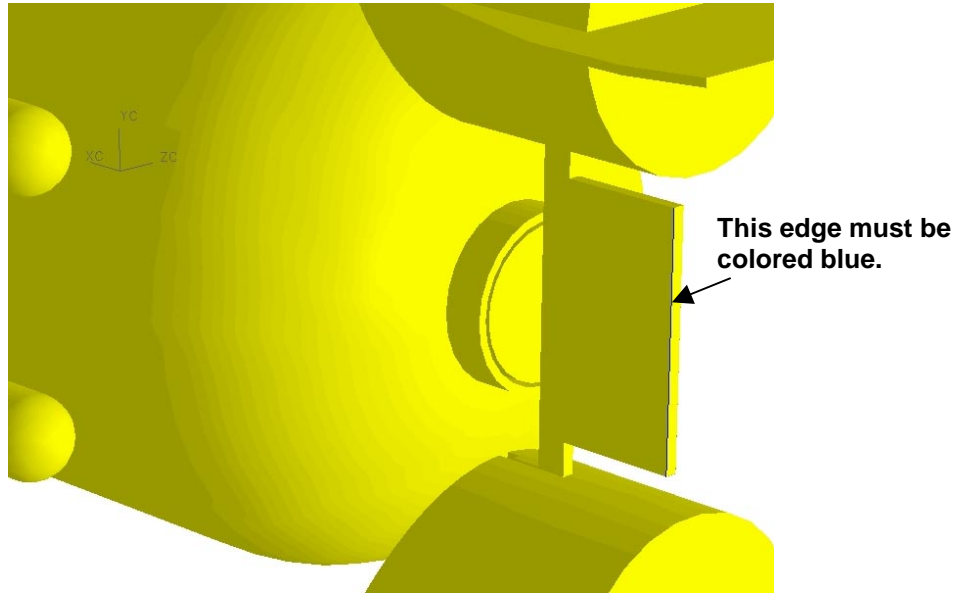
Enlarged View of the 'tail_middle_part' showing Overriding Edge
